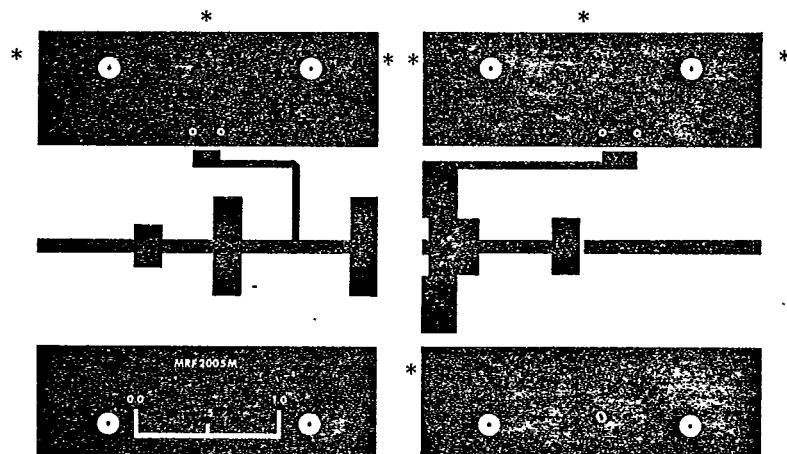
PRINTED CIRCUIT BOARD LAYOUT — 2.0 GHz TEST CIRCUIT
